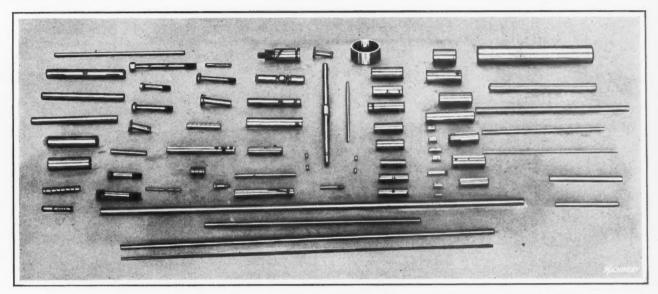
View showing the Large Variety of Parts that may be rough- or finish-ground on the Cincinnati Centerless Grinder
